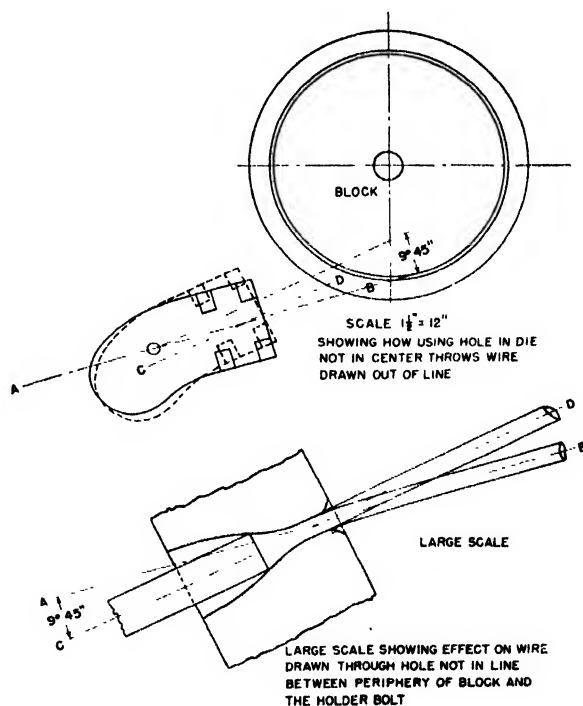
28. Sketches illustrating the importance of proper alignment of the die in wire drawing.
